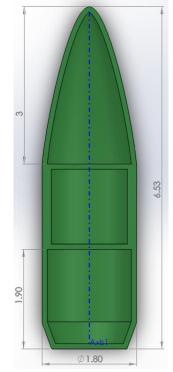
VLD Projectile Sheath Design. All dimensions are in cm.
